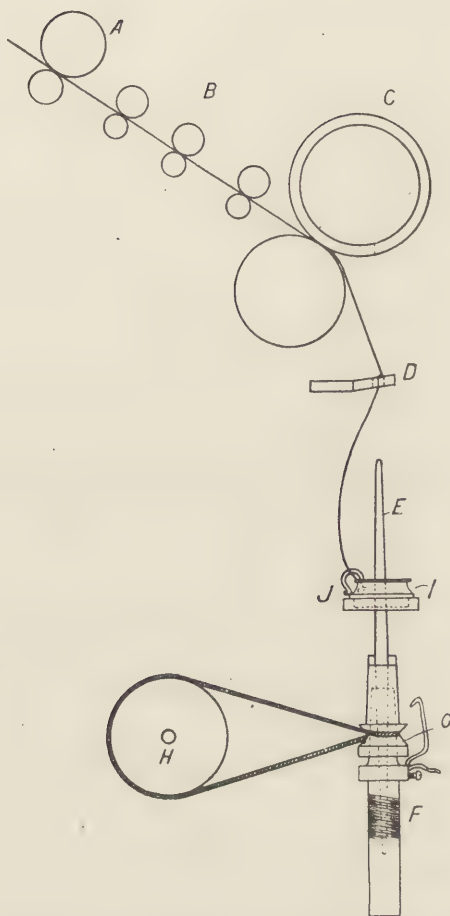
Ring Spring Frame.—*A*, back rollers; *B*, carriers; *C*, front rollers; *D*, eyelet board; *E*, spindle; *F*, spindle support; *G*, spindle whar; *H*, tin drum round which spindle band passes; *I*, ring; *J*, traveller.
